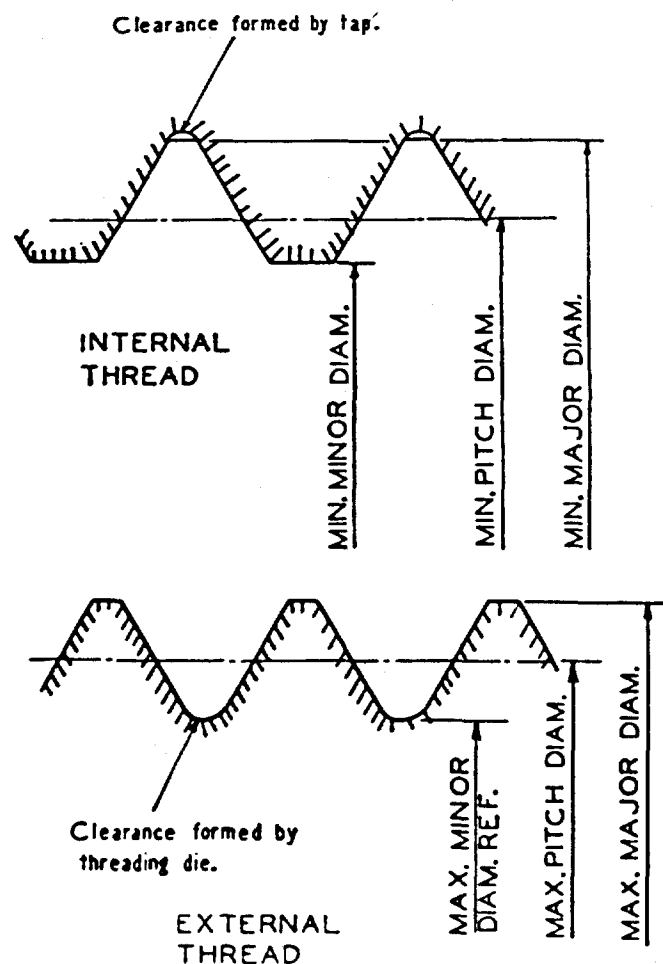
Thread dimensions to be determined for a special thread.
